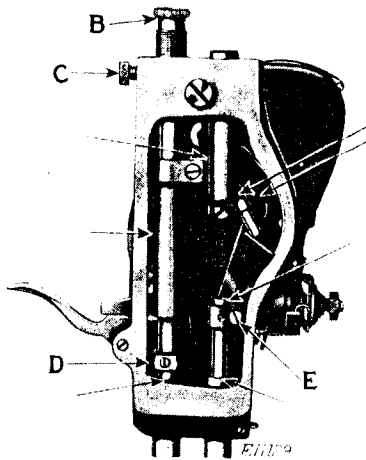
End View of Machine, Showing Oiling Points Also Adjustments
